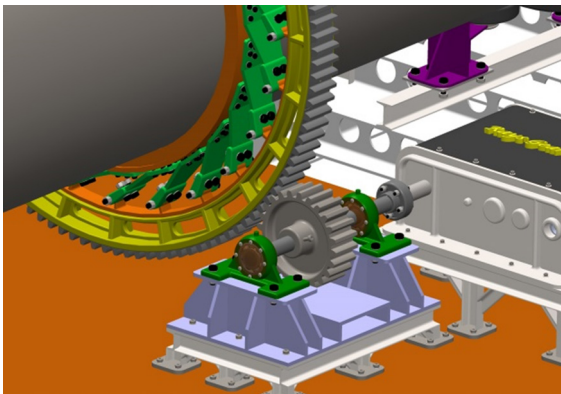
Gear-flange assembly, drive-gear bearing assembly and gear-box transmission assembly in illustration assembly drawing
